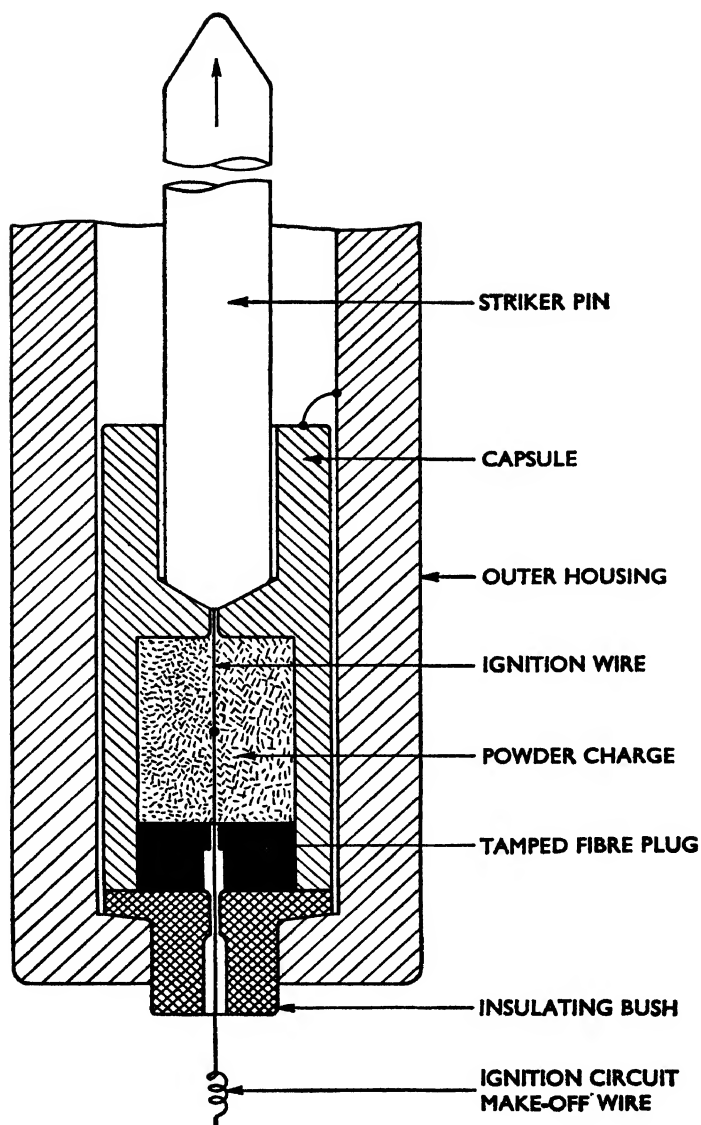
Elements of striker assembly greatly enlarged (EMP. Electric, Ltd.).
